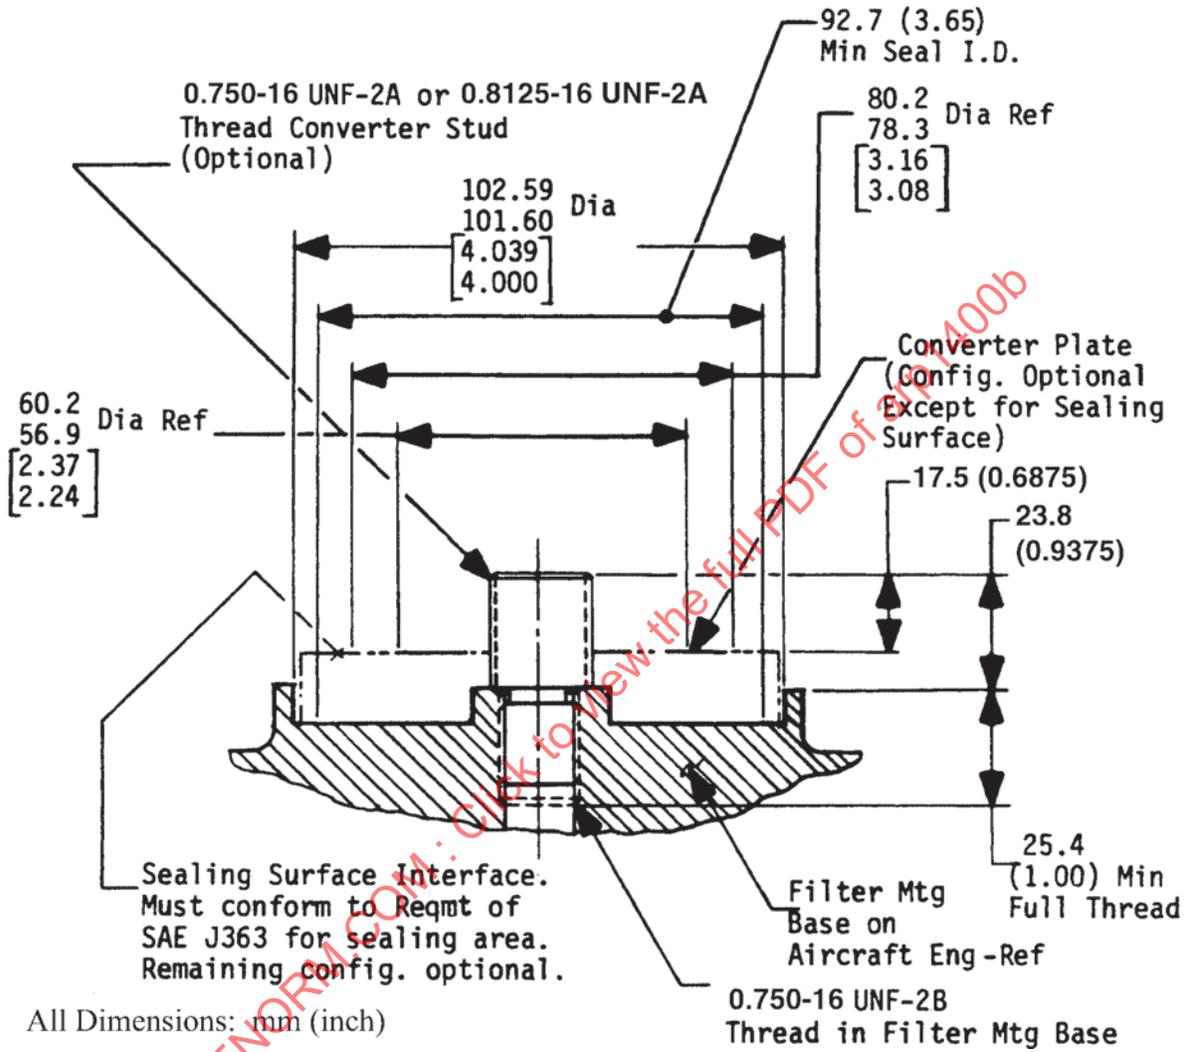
Interface Definition for Conversion to Spin-on Filters (from Shell & Bolt Filter Assemblies)
